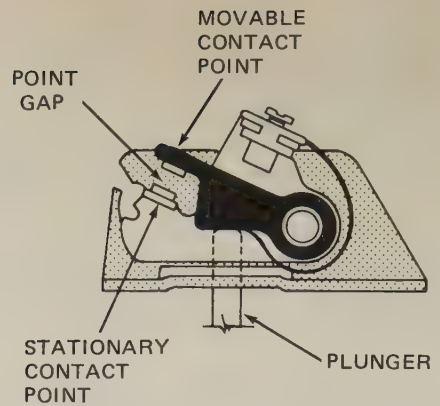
Contact point set for a small engine. (Kohler Company)
